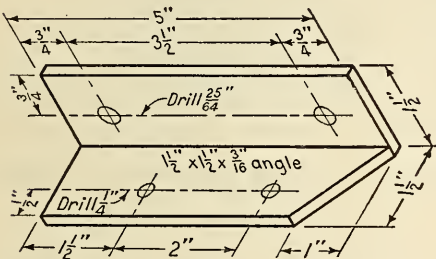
Upper rear throat-spring bracket, Massey-Harris corn binder
